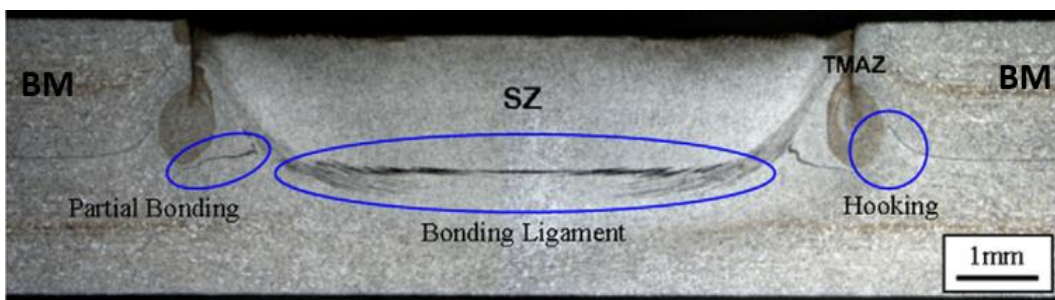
Typical cross-section of a FSpW weld in EN AW-6181-T4 [15].
